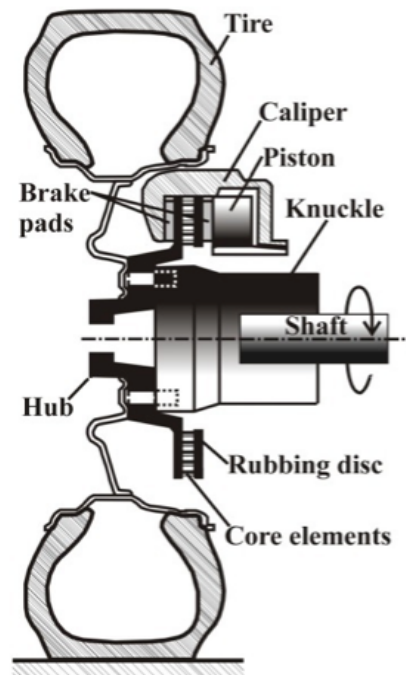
Conventional brake system showing brake disc, pads and caliper.
